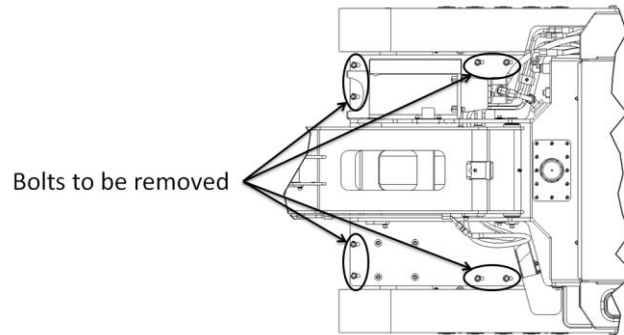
Bolts to remove to separate the upper section of the MINIDOZER
